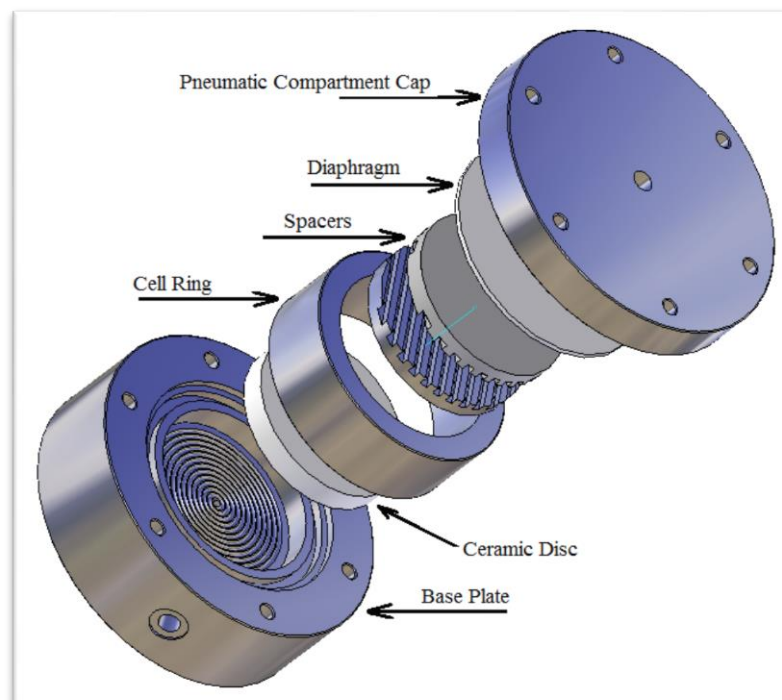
Isometric assemblage of the basic components of the modified cell.
